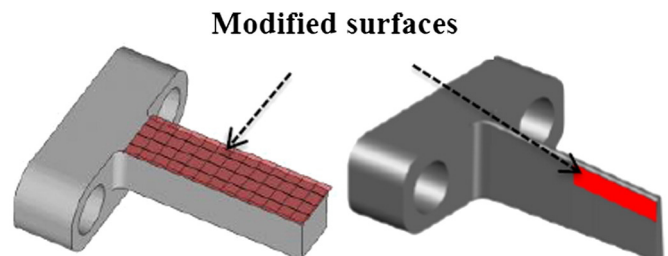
Typical T-shaped flat (left) and airfoil (right) samples machined.
